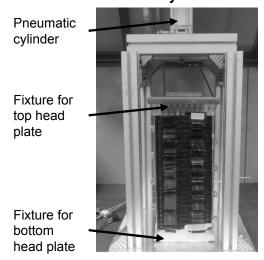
Service sub-assembly held together by a pneumatic piston, for the insertion of side plates
